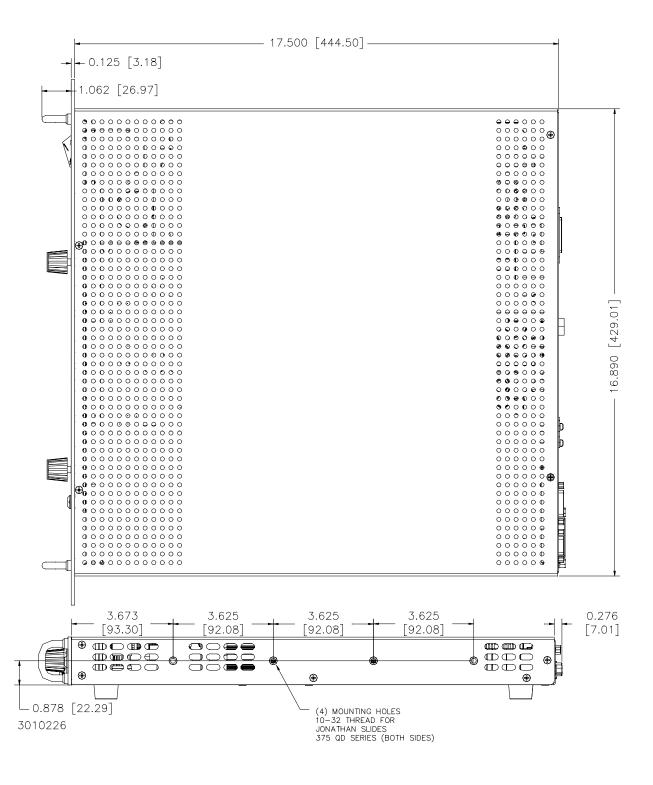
KLP SERIES POWER SUPPLY, MECHANICAL OUTLINE DRAWING (SHEET 1 OF 2)
